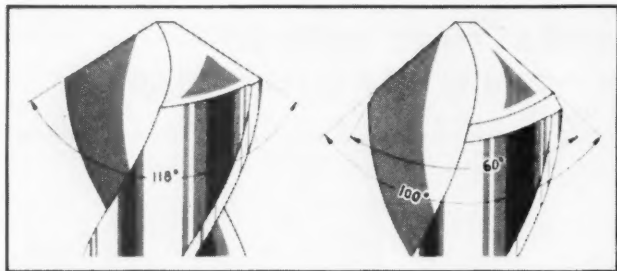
Change in drill grind (righthand view) which increased tool life 300 per cent.
